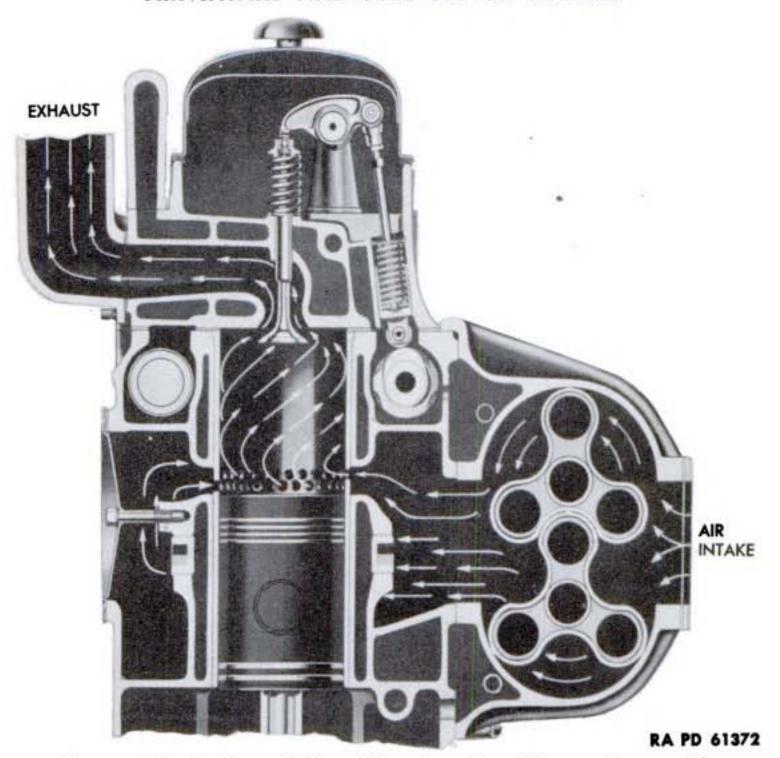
Sectional View Showing How Blower Forces Air Into Cylinders
